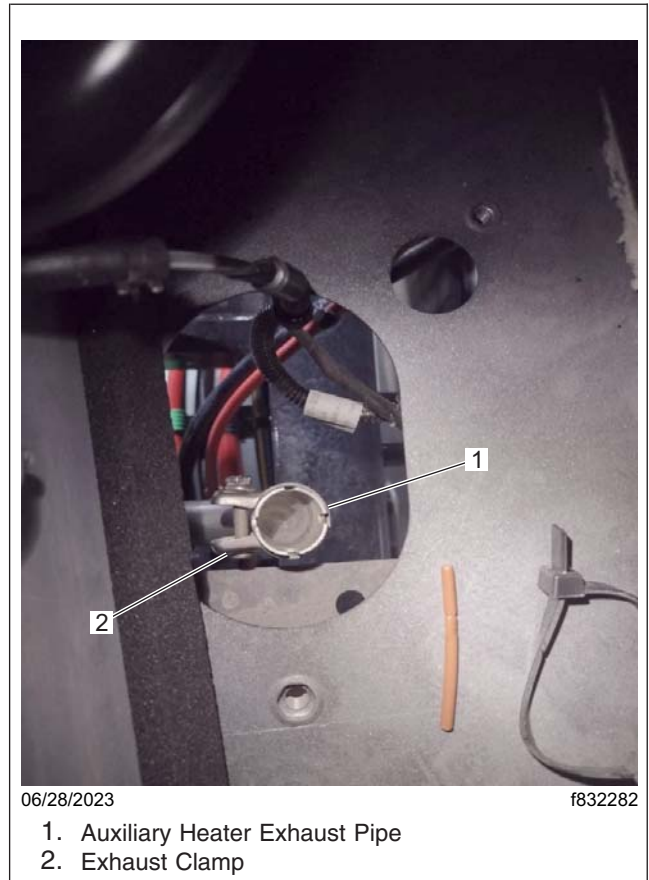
, Auxiliary Heater Exhaust Pipe Location
